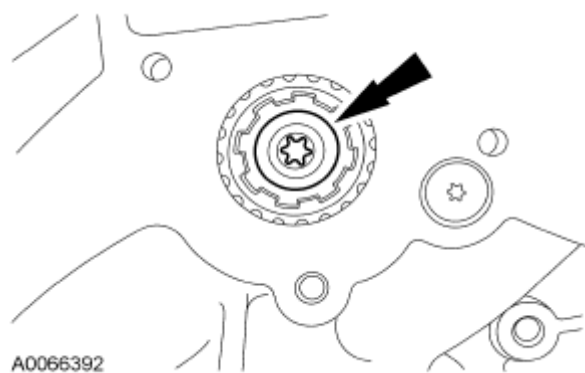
Locating Jackshaft Sprocket Rear Bolt
